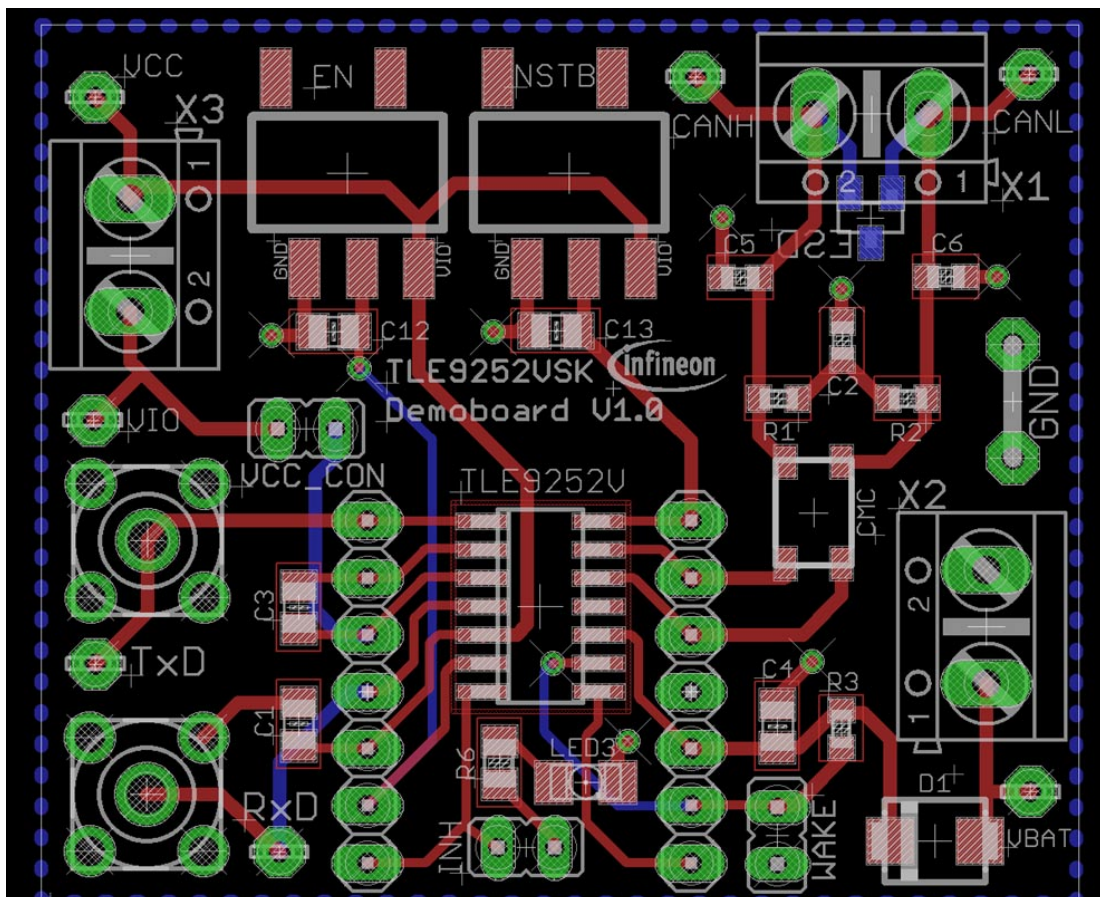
PCB layout of TLE9252VSK Demoboard (Top + Bottom)
